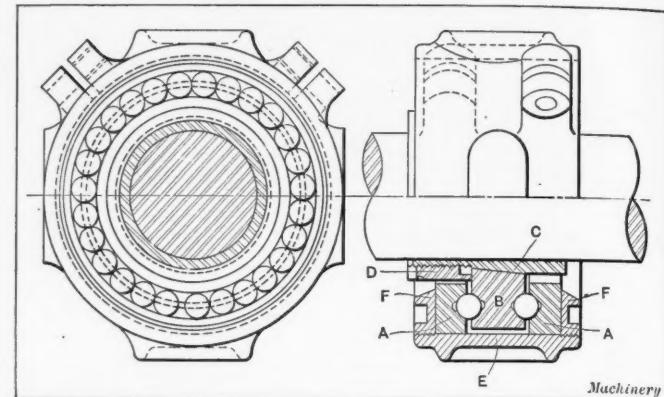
End and Cross-sectional Views of Suspension Ball Bearing
